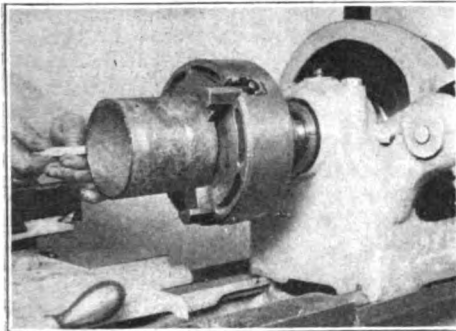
The Tub Should Be Chucked So It Will Run True.
